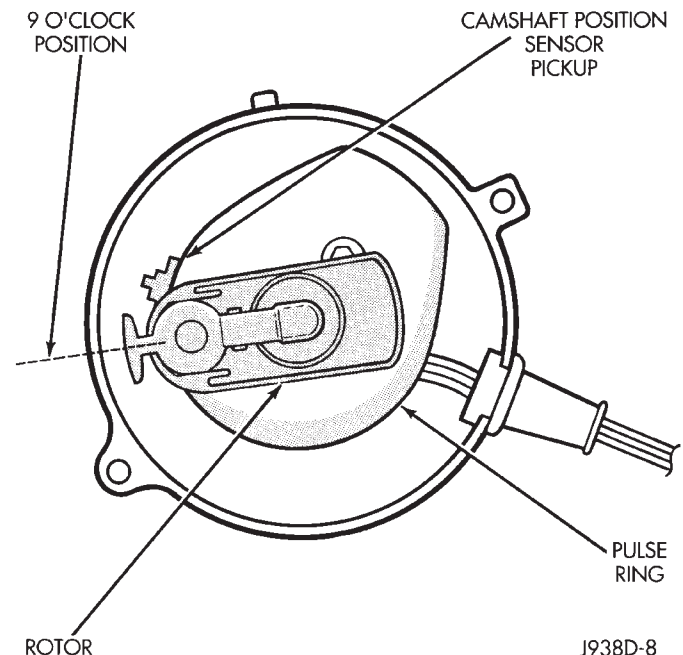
Pulse Ring/Rotor Position—4.0L Engine
